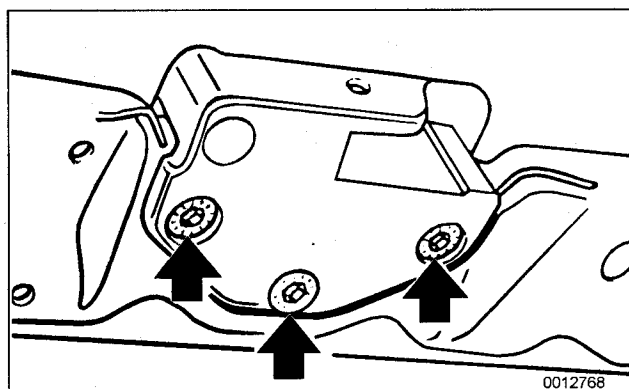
Visor latch plate is held to top of windshield with three bolts (arrows).
